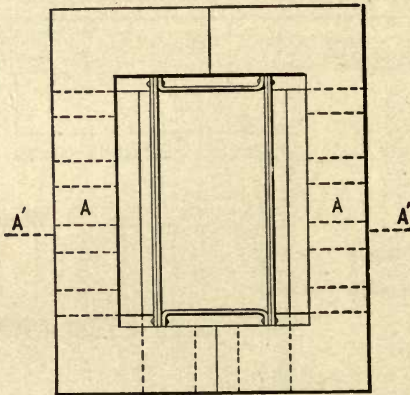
Top Plan of Small Galvanizing Kettle.
